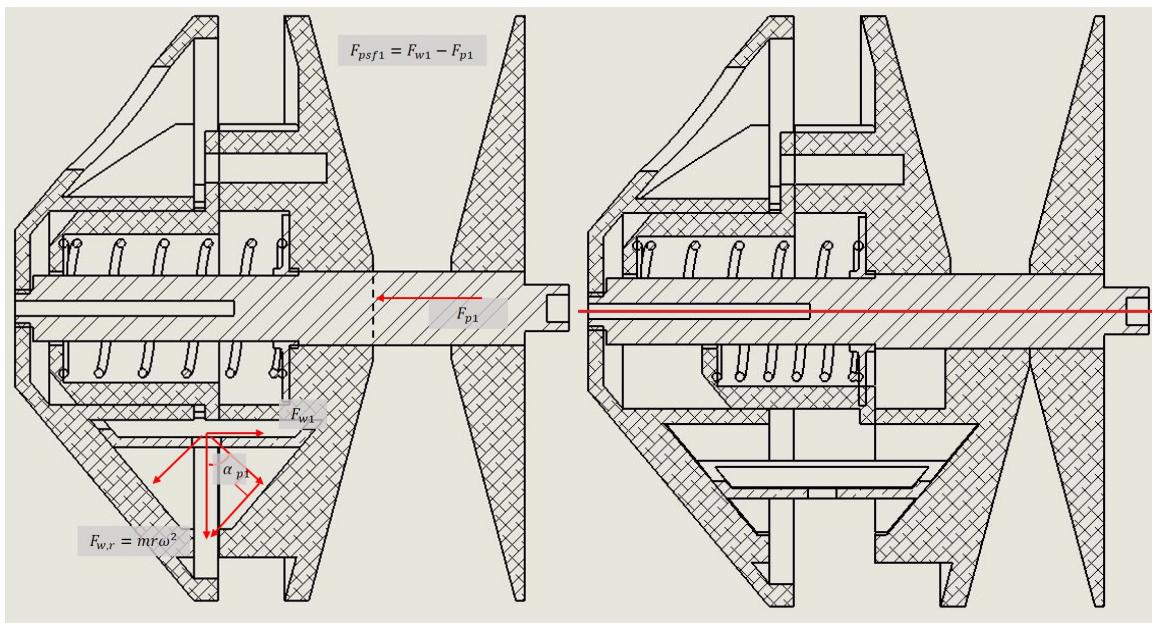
Left: Free body diagram of shifting forces in primary clutch. $F.w1$, axial force on moveable sheave due to centrifugal force; $F.p1$, axial force of compression spring. Right: Open (top) and closed (bottom) positions of the primary clutch
